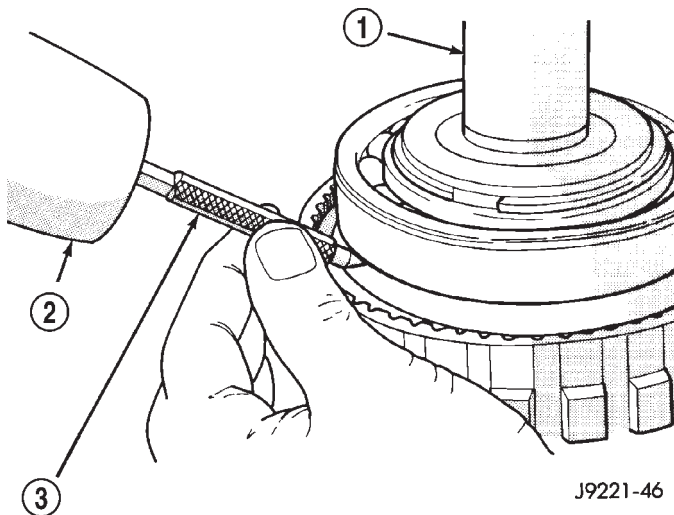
Marking Annulus Gear And Output Shaft For Assembly Alignment
